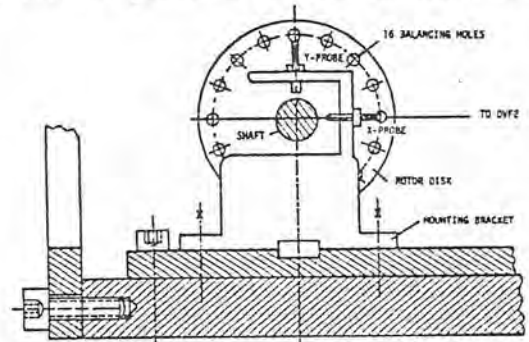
Rotor Cross Section Showing Typical Probe Configuration
